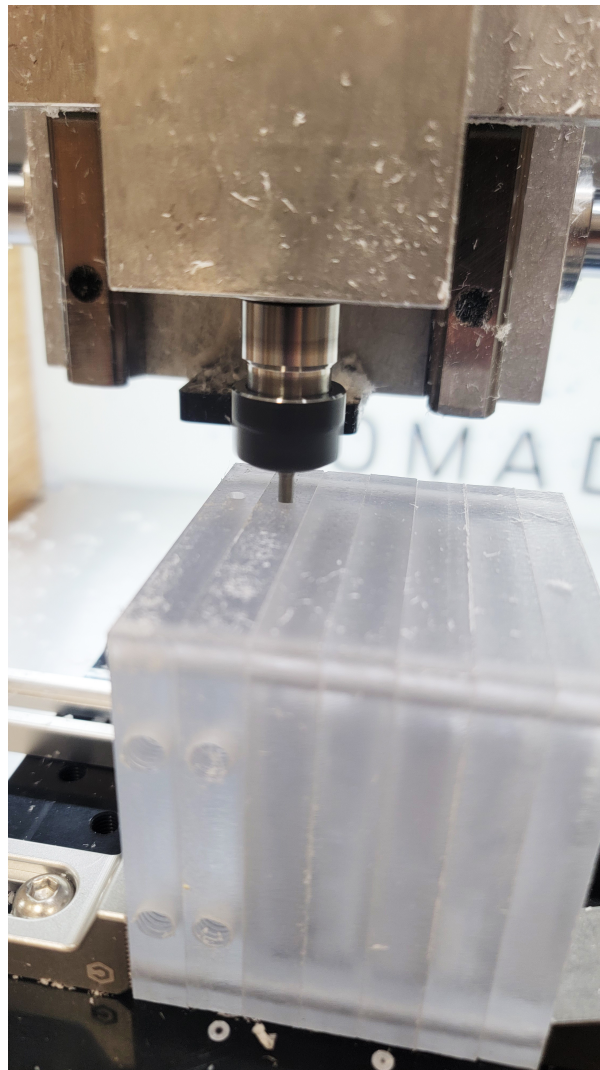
Side milling procedure A set of parts is fixtured side-on using Carbide3D Tiger Claw clamps. A Nomad3 CNC mill is used to mill consistently sized and positioned side channels in this set of parts parts using a square endmill.
